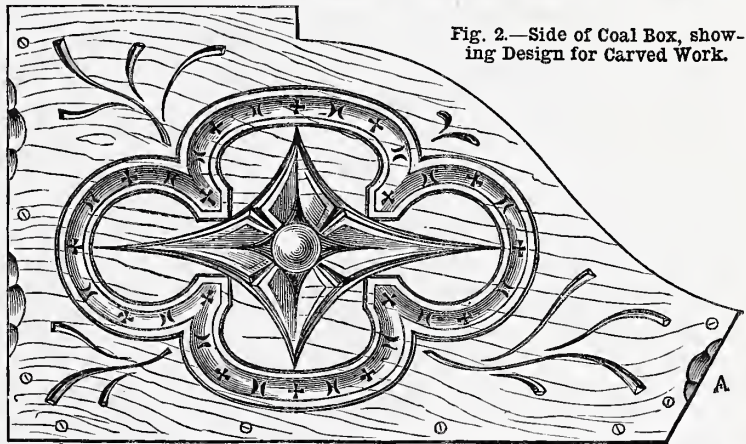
Side of Coal Box, showing Design for Carved Work.
